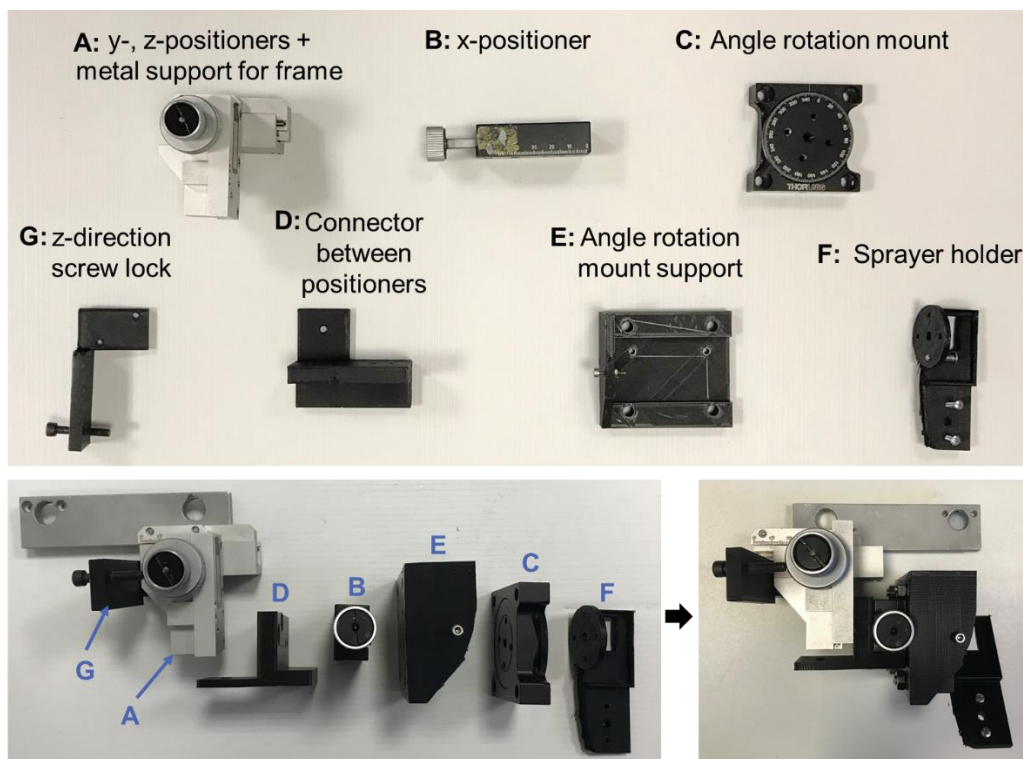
Top: Components of the sprayer holder set-up: A – C: purchased components of the set-up D – G: 3-D printed pieces in polylactic acid. Bottom left: order of assembly of components. Bottom right: Assembled sprayer holder set-up.
